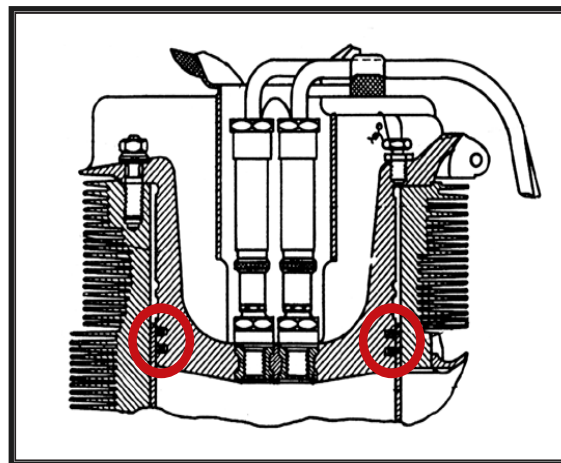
SVE head/sleeve sealed by “junk” head piston rings that replaced the head gasket in the 18 cylinder, 36 liter Bristol Hercules air cooled radial engine (1400-2000 hp). In spite of two sets of piston rings per cylinder and sleeve valve viscous drag being much higher than the power to operate the poppet valves, production SVE’s had total friction “usually lower” than conventional designs according to Ricardo, while it was well established that certain experimental SVE’s had significantly lower friction than conventional engines similar in all other respects.
